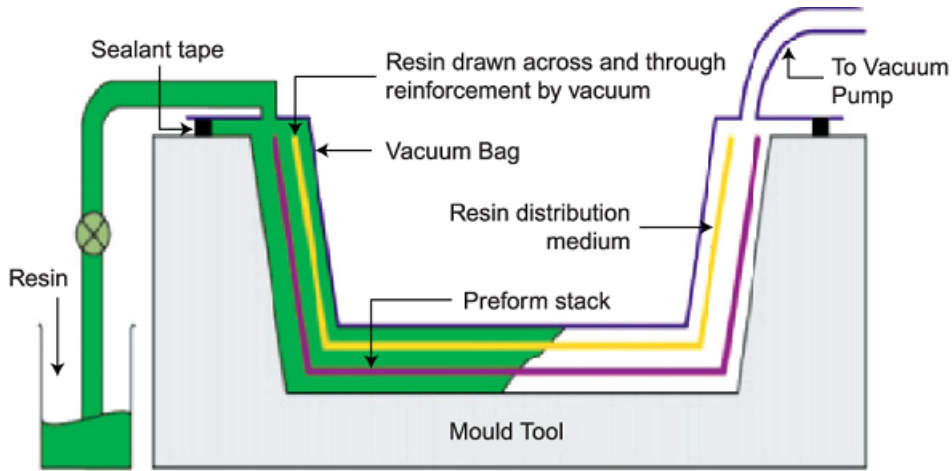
Diagram of the Vacuum Assisted Resin Transfer Moulding (VARTM) process [4].
